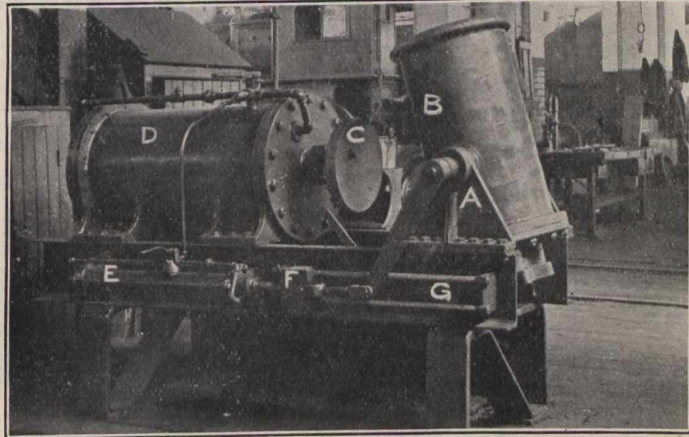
Grease Cellar Moulding Machine in Open Position.
